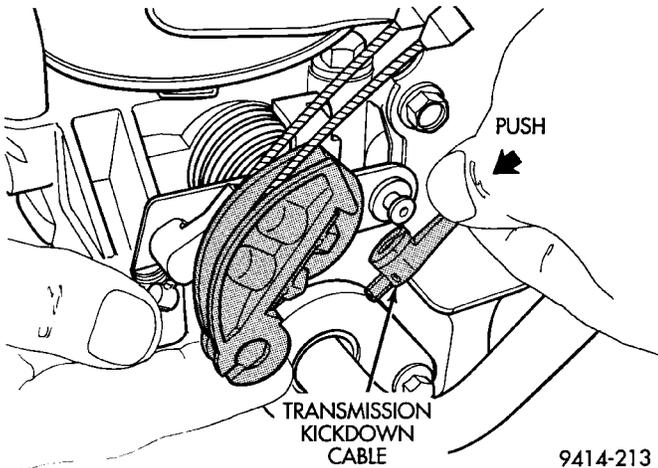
Throttle Body Cables Attachment to Throttle Body
